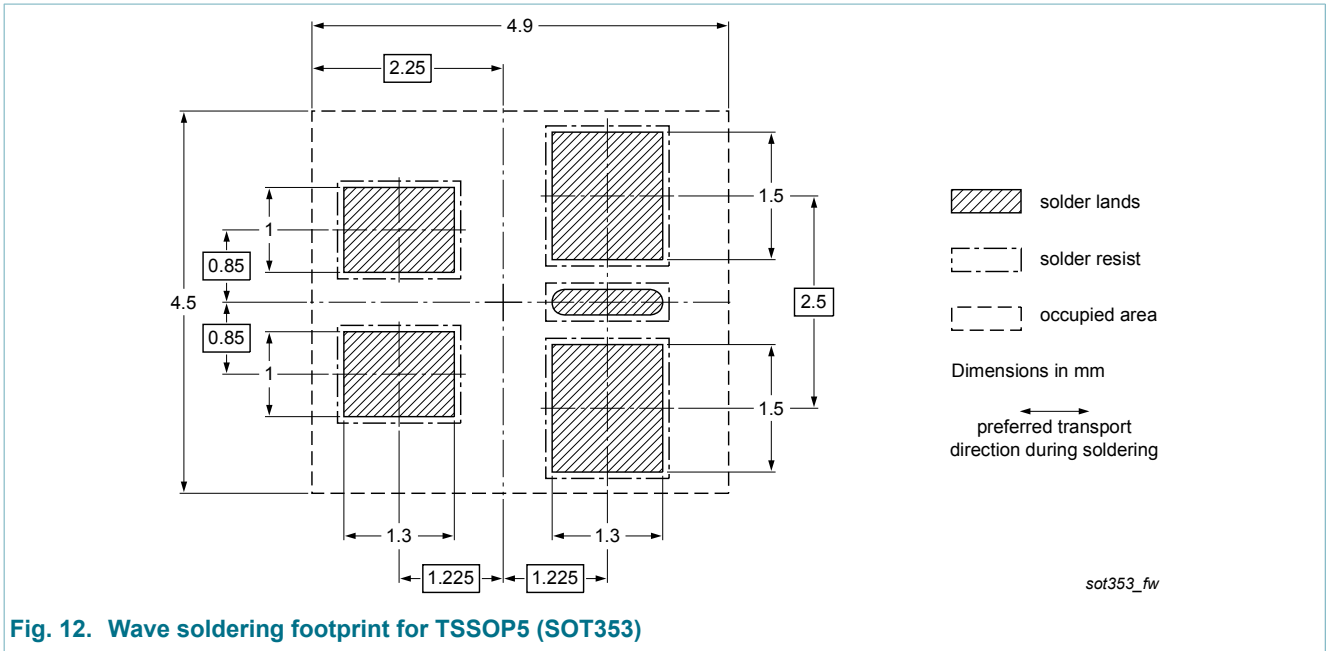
Wave soldering footprint for TSSOP5 (SOT353)
